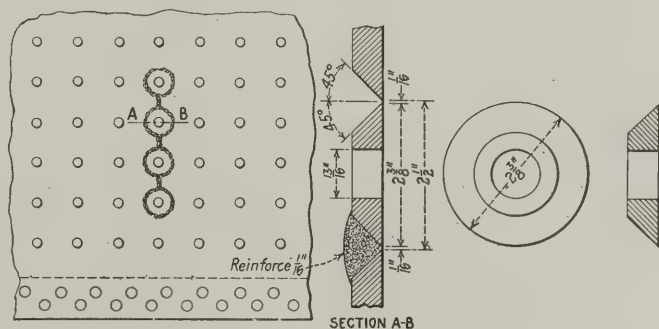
Method of Welding Cracks Through Staybolt Rows; Gas
